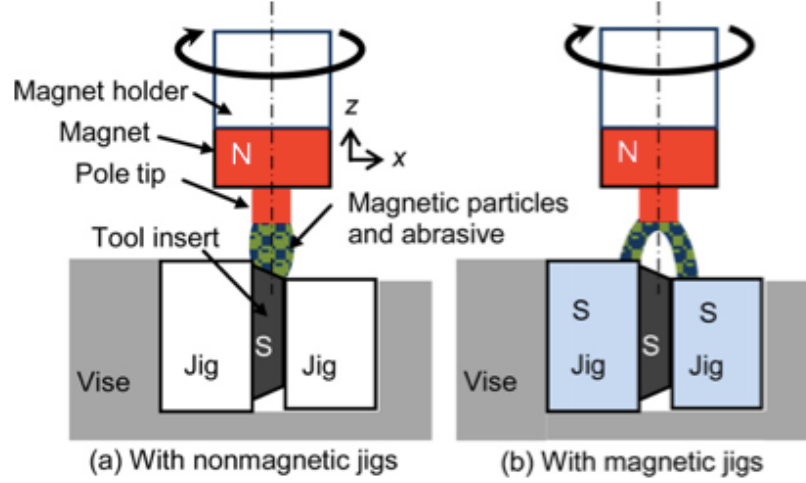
Schematic diagram of FMAB finishing of cutting tool faces (a) with non-magnetic jigs and (b) with magnetic jig [57].
